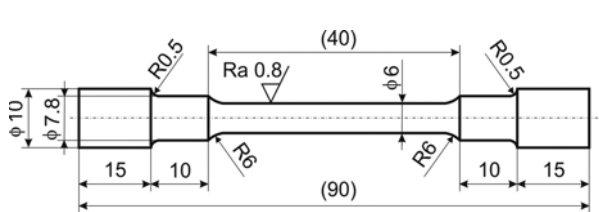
Shape and dimension of tensile test specimen (dimension in mm)
